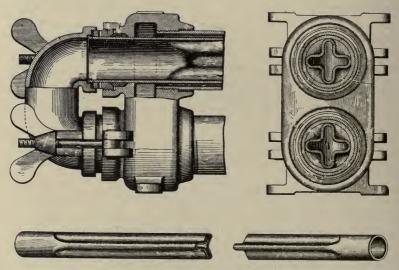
SECTIONAL VIEW WITTEMANN'S BEER COOLER.
